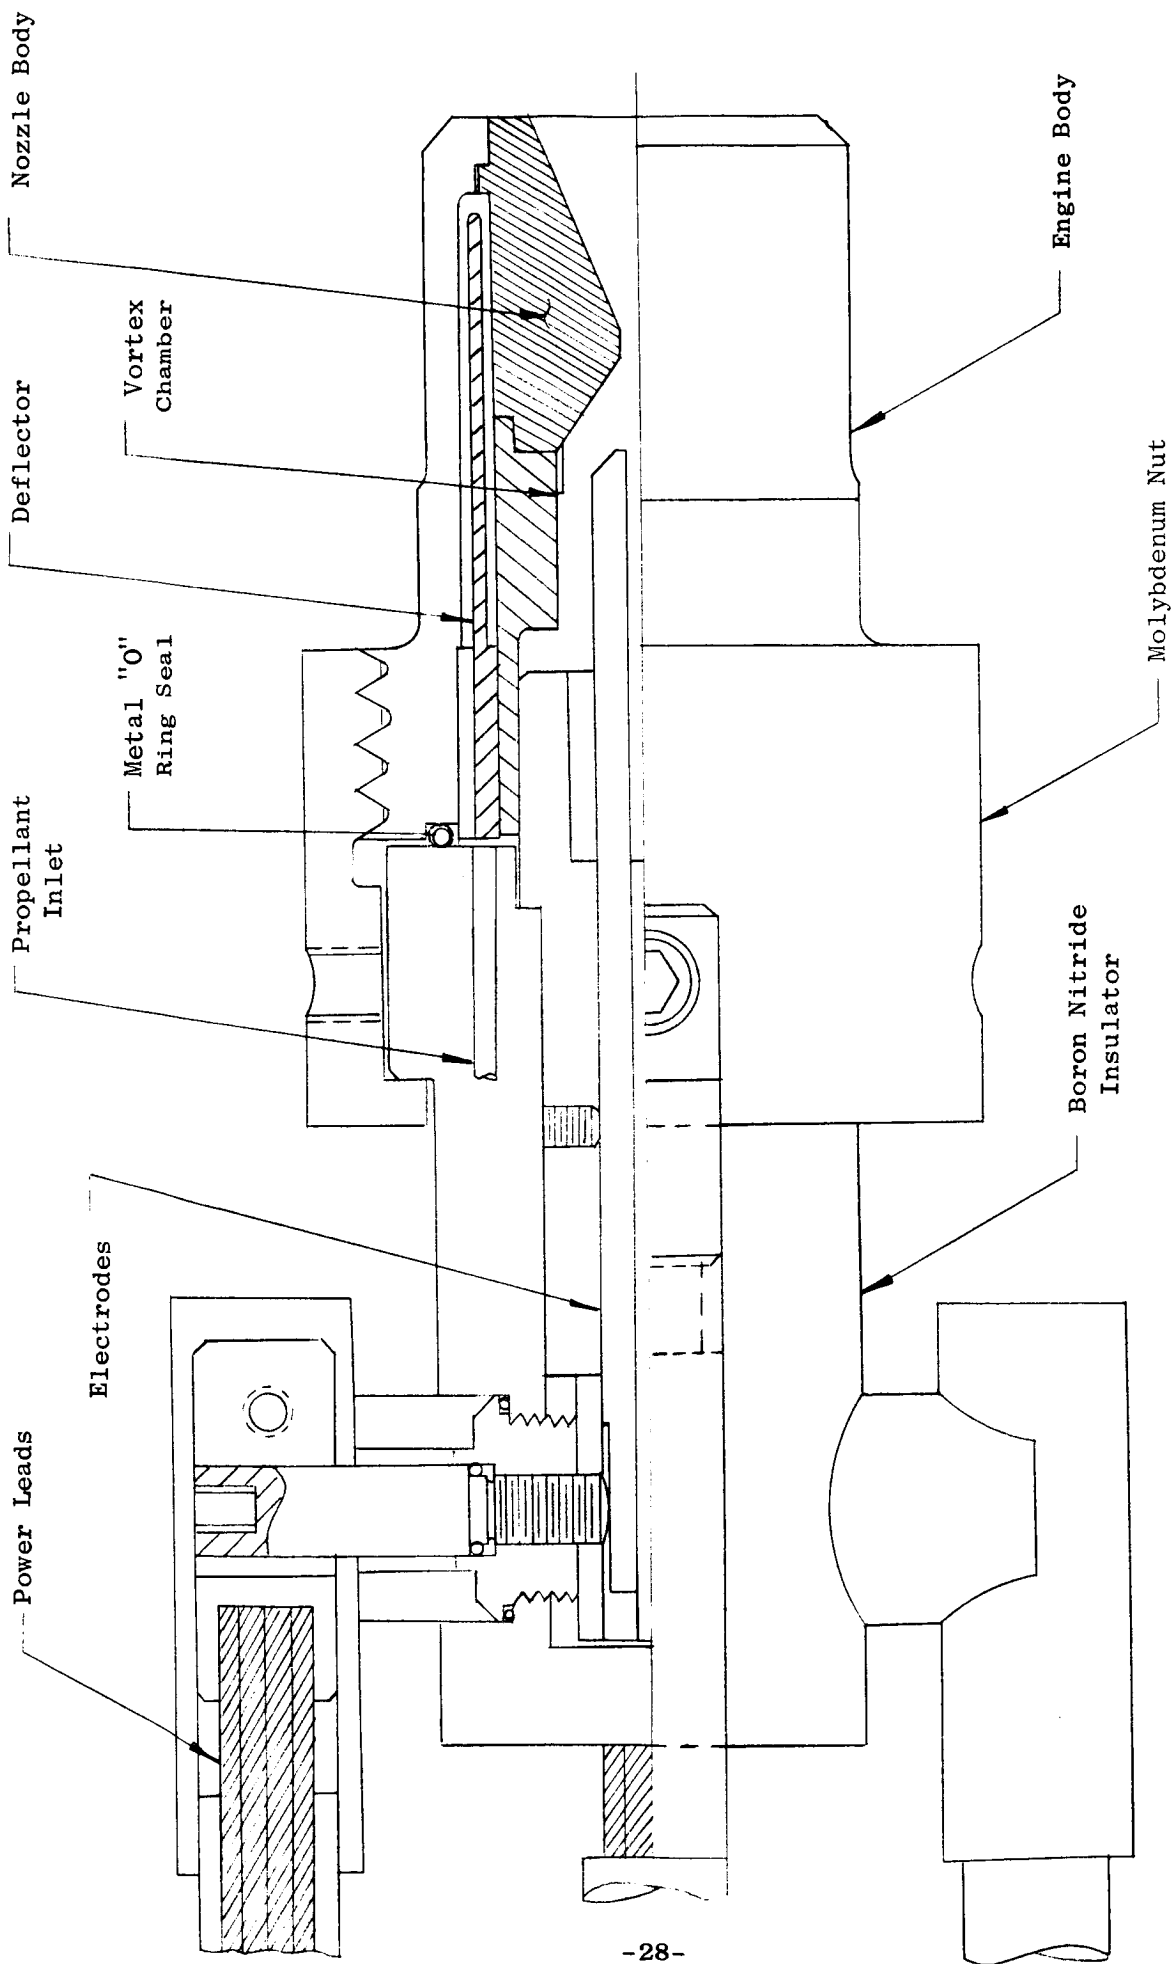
Exploded View of 30 KW Three-Phase Plasma Arc Jet
